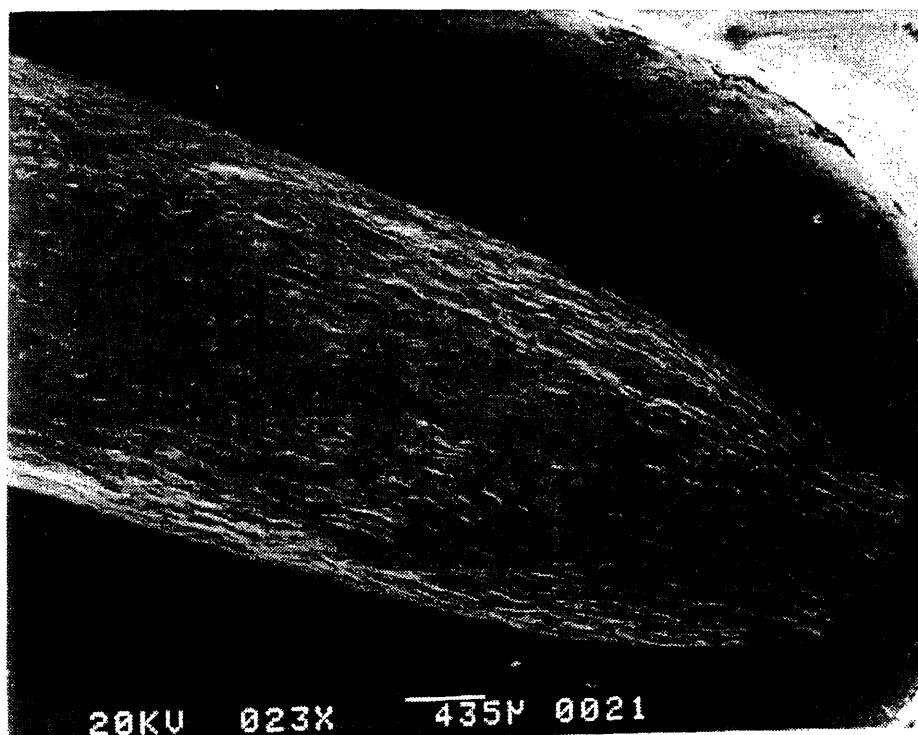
Side view of the fracture surface of specimen 80 (alloy 304 irradiated to $0.8 \times 10^{21} \text{ cm}^{-2}$ ($E > 1 \text{ MeV}$)).
